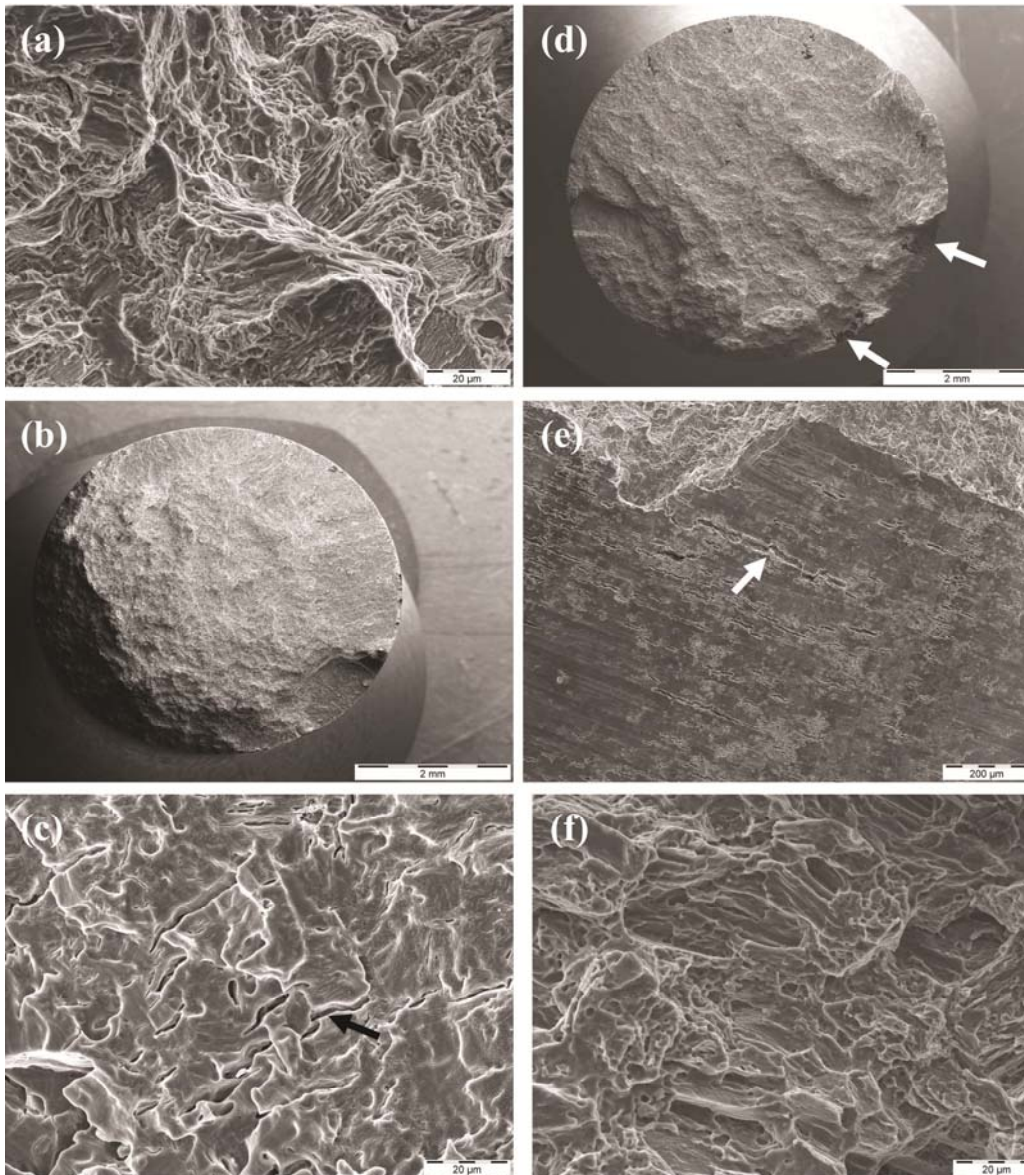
Fracture surfaces of AZ80 alloy: (a) air – ductile fracture; (b) and (c) distilled water – (b) brittle fracture and (c) transgranular cracking and secondary cracks; (d), (e) and (f) 0.5wt.% NaCl solution - (d) brittle fracture and localized attack along the edge, (e) surface of tensile sample showing high localized attack, and (f) exhibits transgranular cleavage and a few fine dimples.
